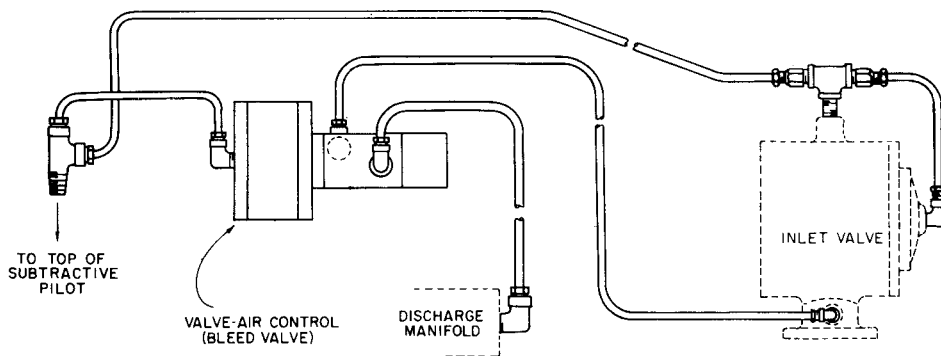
4. — BLEED AIR VALVE FOR
